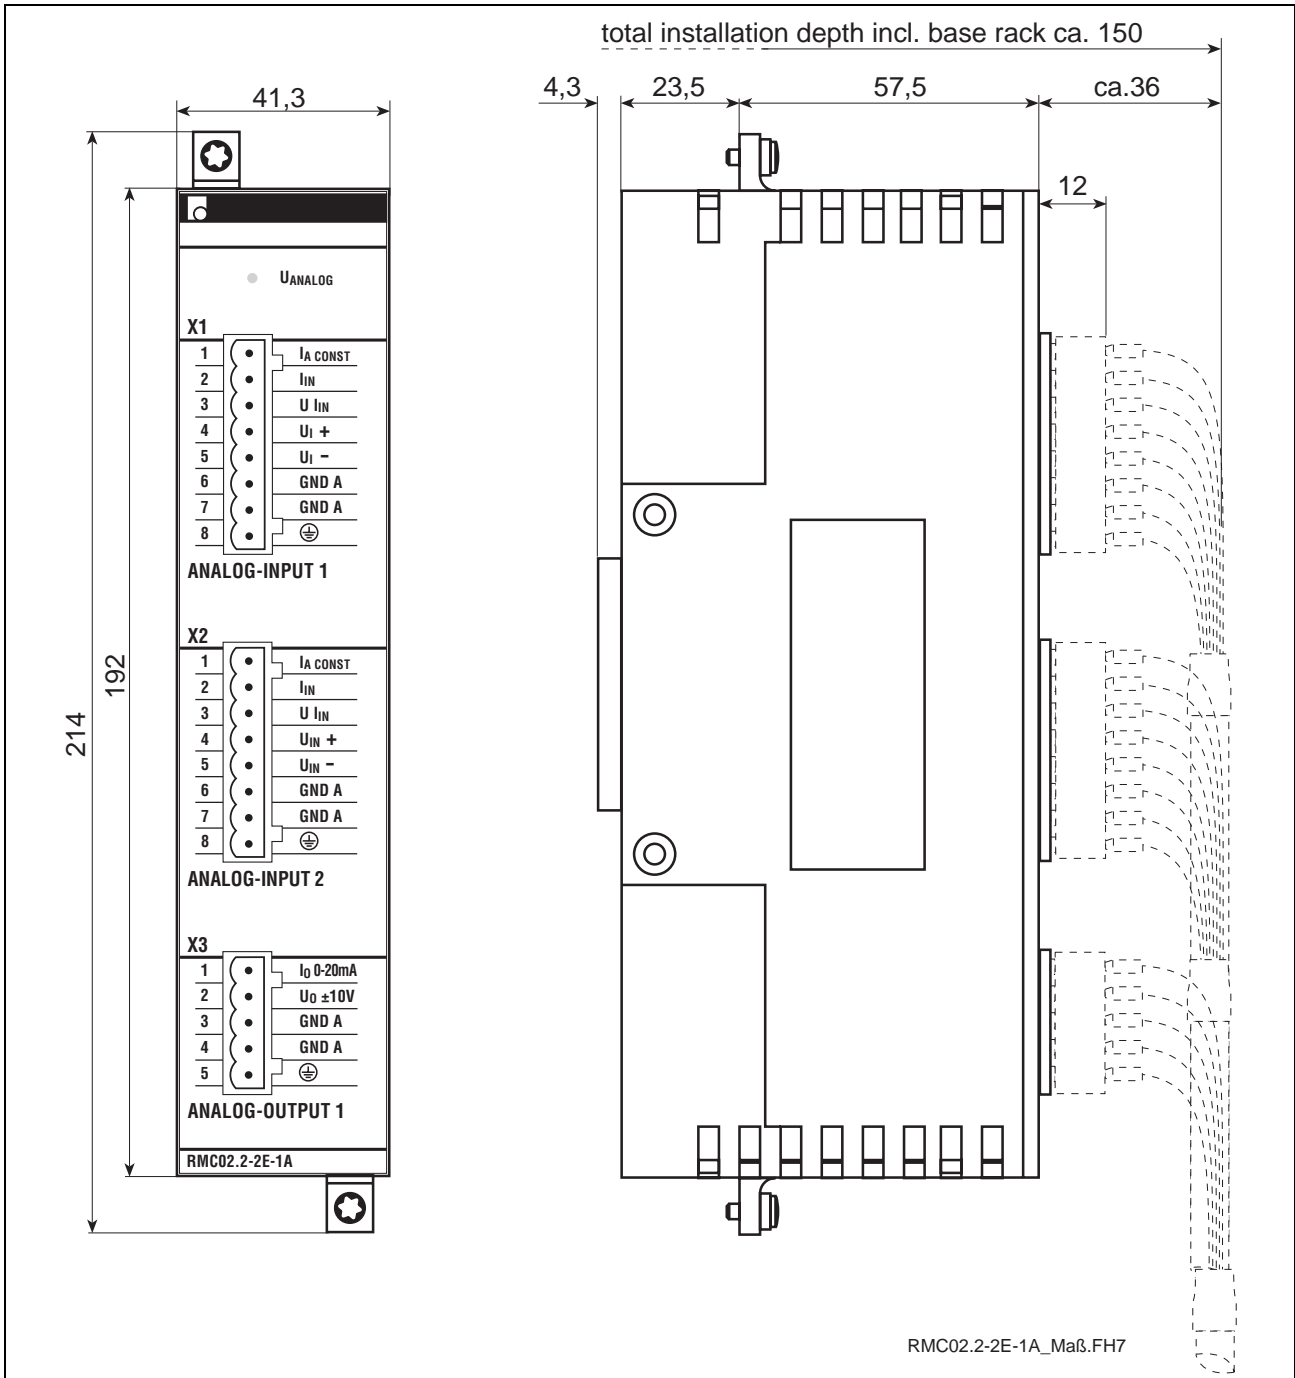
Mounting dimensions of RMC02.2-2E-1A
